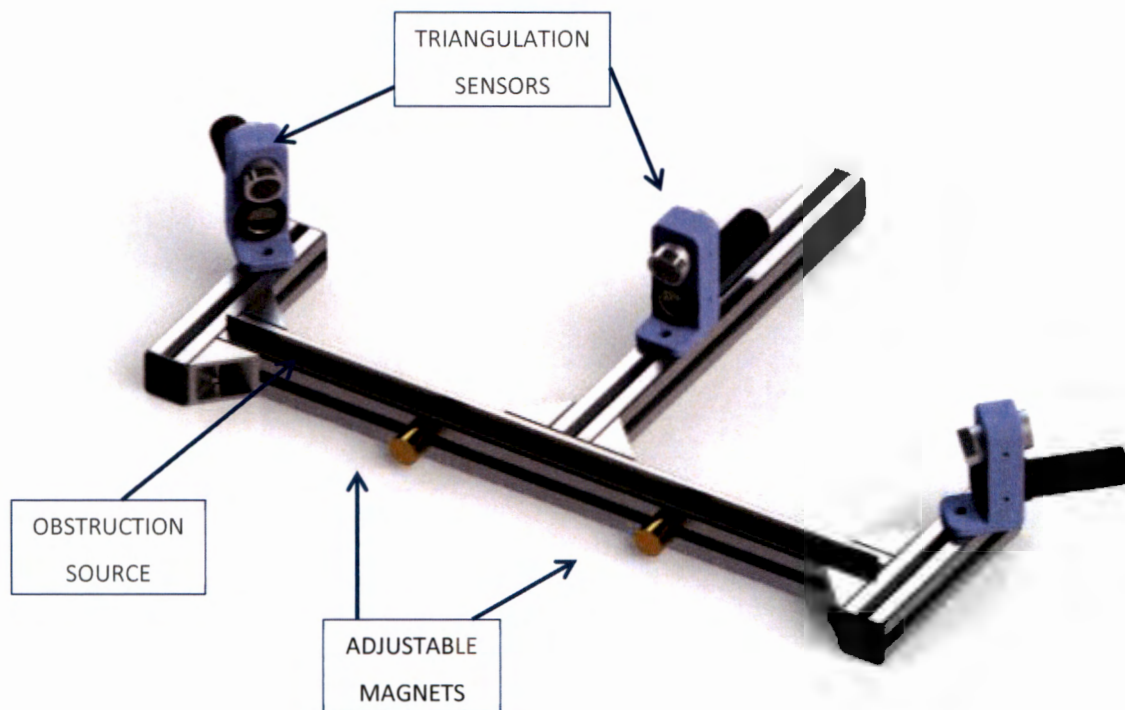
FINAL DETAIL DESIGN OF PROTOTYPE PROFILER
